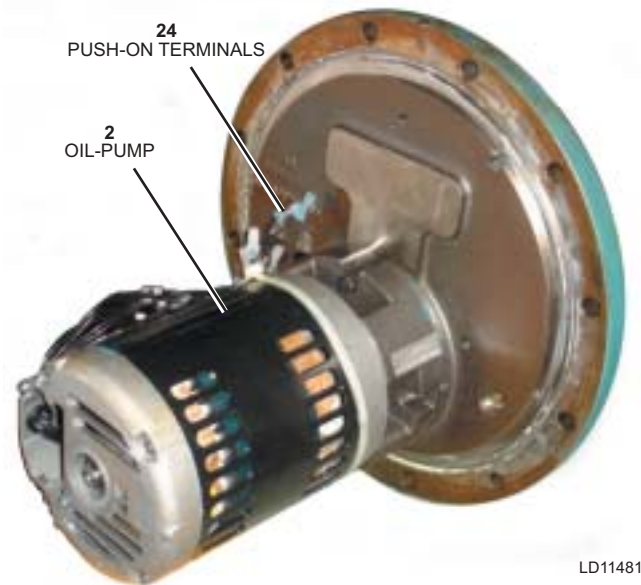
OIL PUMP & COVER PLATE REMOVAL
